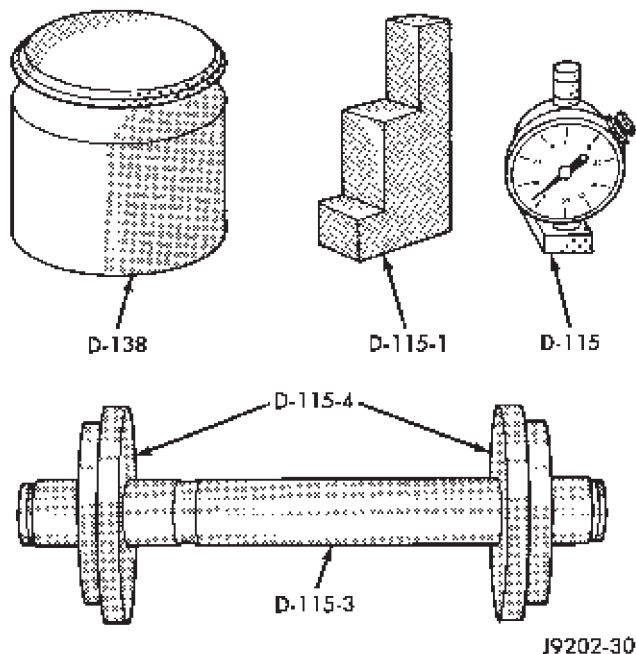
Pinion Gear Depth Gauge Tool Set D-115-30
